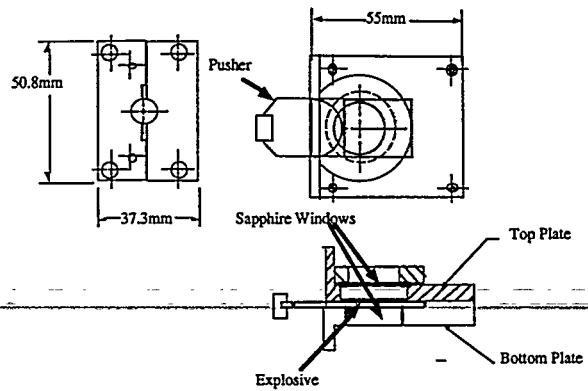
Confinement assembly showing explosive containment and optical access.
